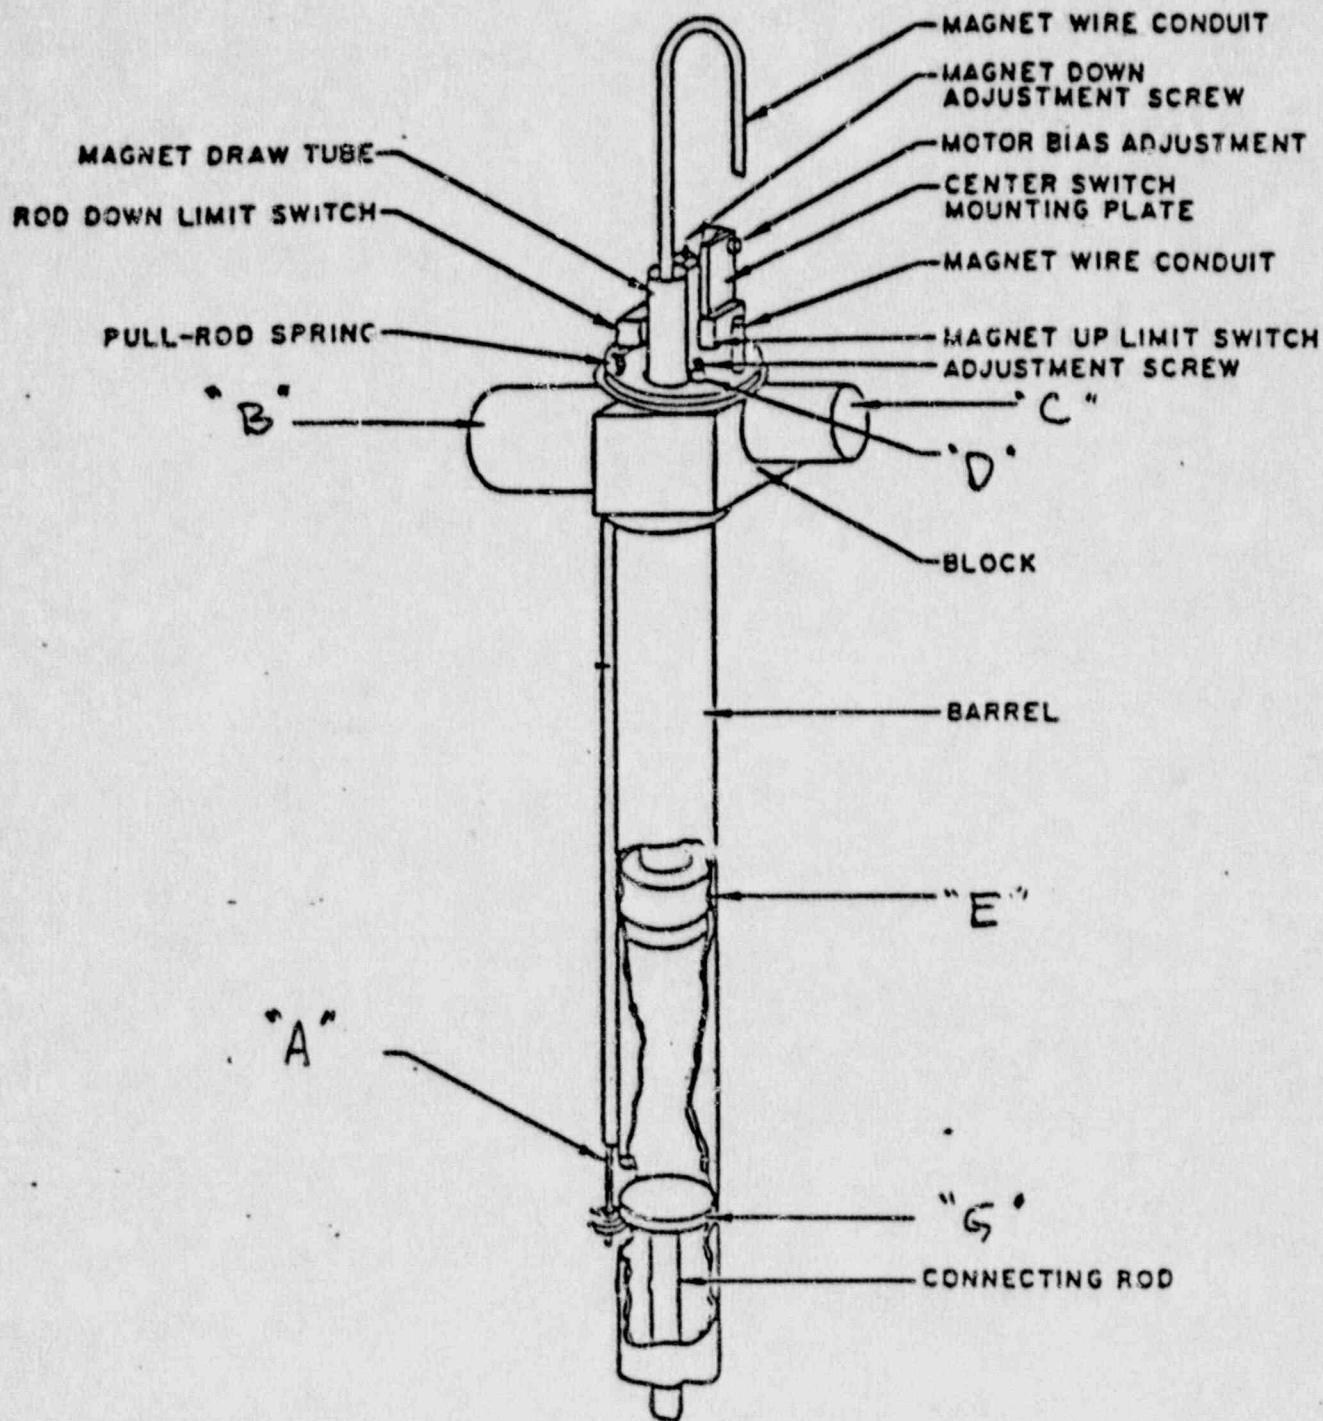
Rod drive mechanism, showing components and adjustment locations
